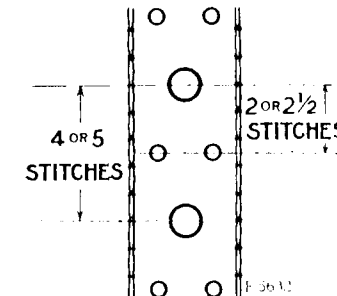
Diagram Showing Correct Number of Stitches Between Holes in Three Hole Perforating Design Made on Machines 22w73 and 22w74
